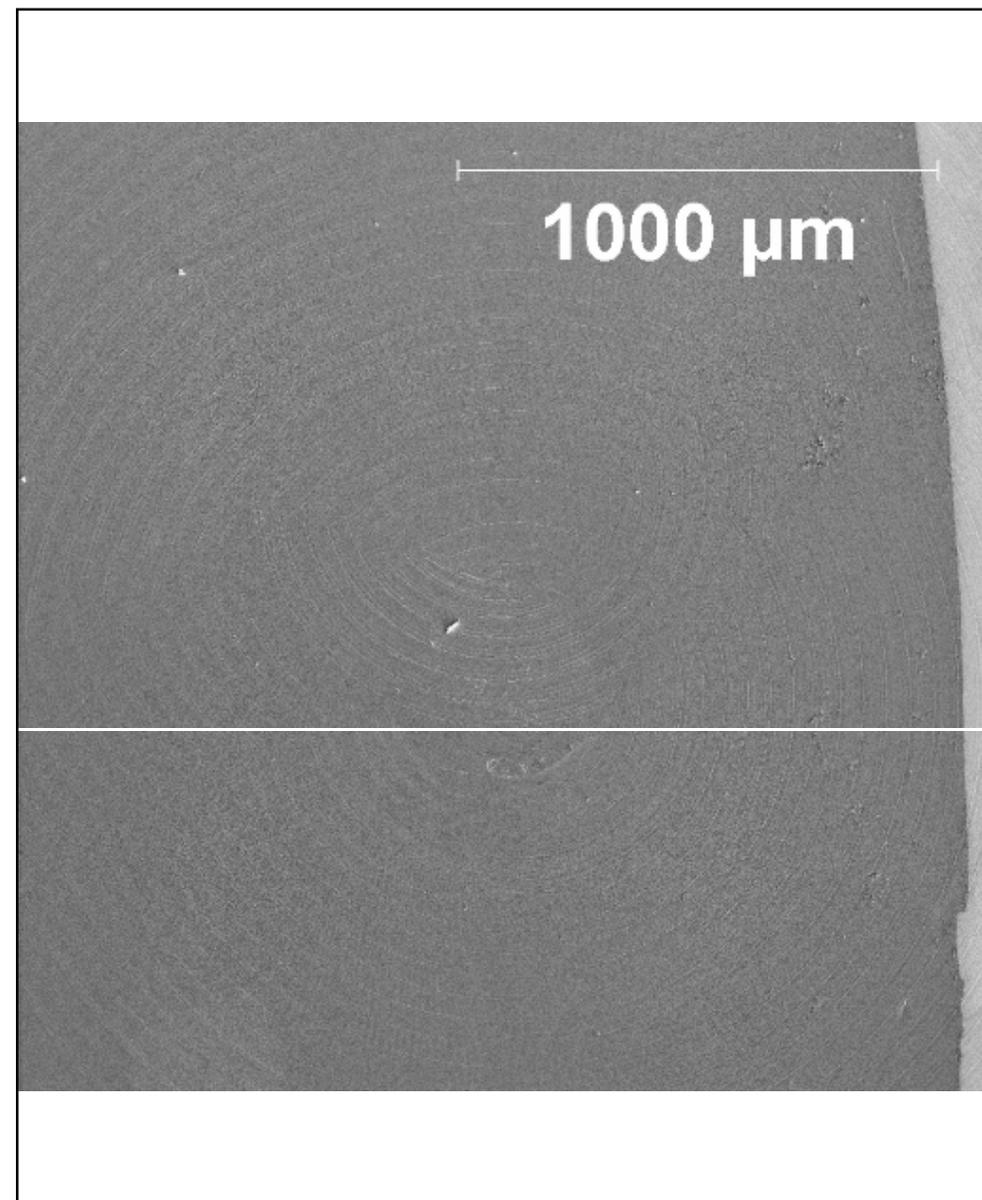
GTF cathode, after first re-machining off-axis. Shown are the off-axis machining "centers".
